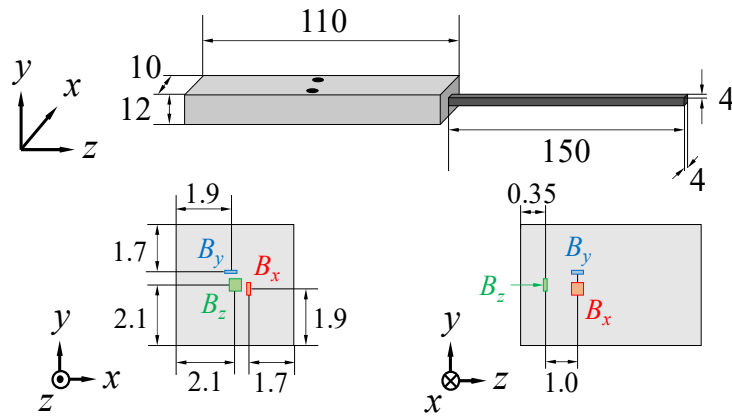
Dimensions and measurement points of the 3-axis probe (Unit : mm)
